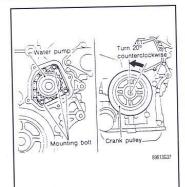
After the three water pump bolts are removed, turn the crankshaft to loosen the timing chain slightly
